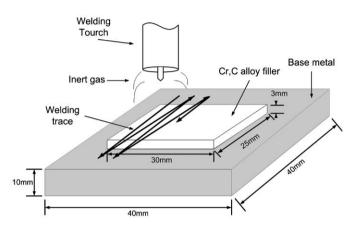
Schematic diagram of the hardfacing welding.
